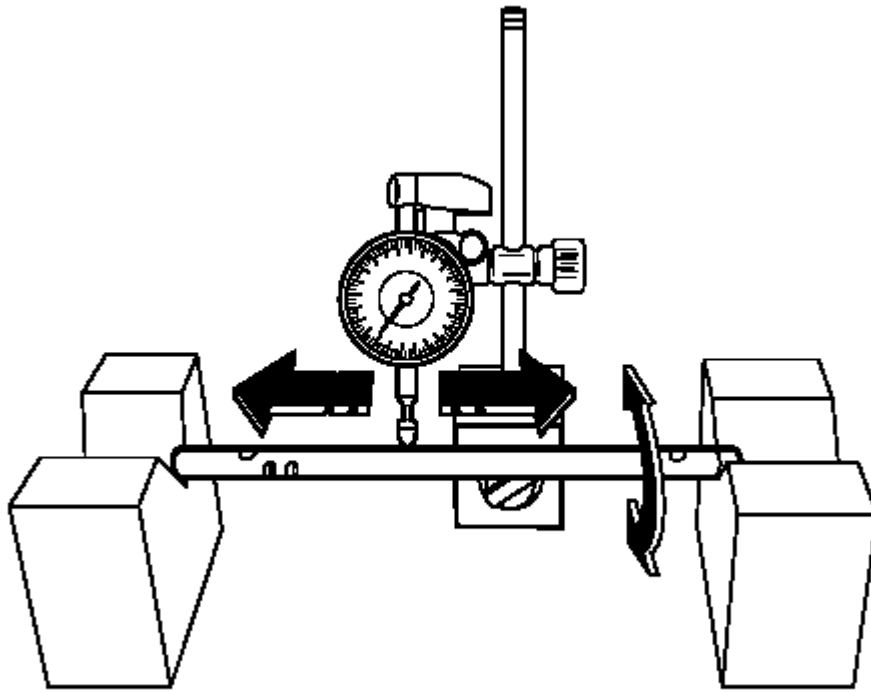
Shift Shaft and Fork Assemblies Cleaning and Inspection (HD)
